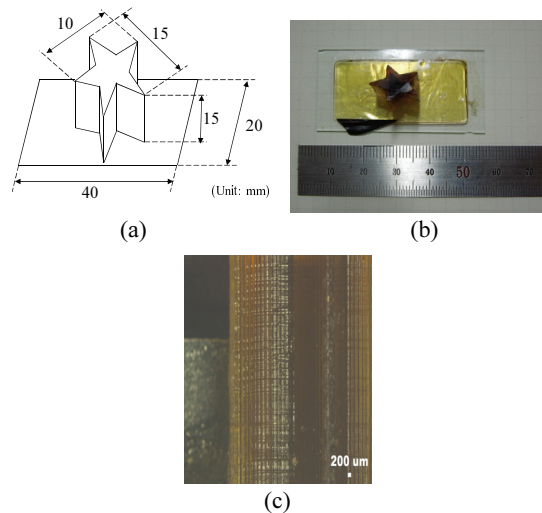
Fabrication of star type structure with various edges using scanbeam-SLA (a) 3D model (b) Front view (c) upper view
